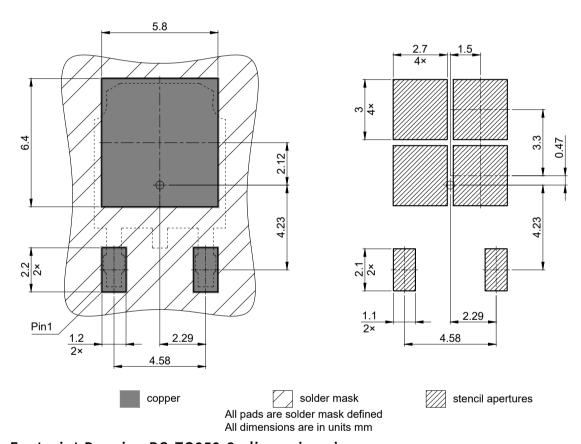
Footprint Drawing PG-TO252-3, dimensions in mm
